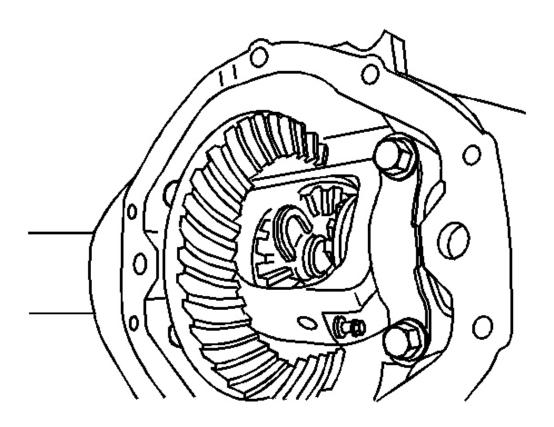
C-Lock From Button End Of Axle Shaft Courtesy of GENERAL MOTORS CORP.
